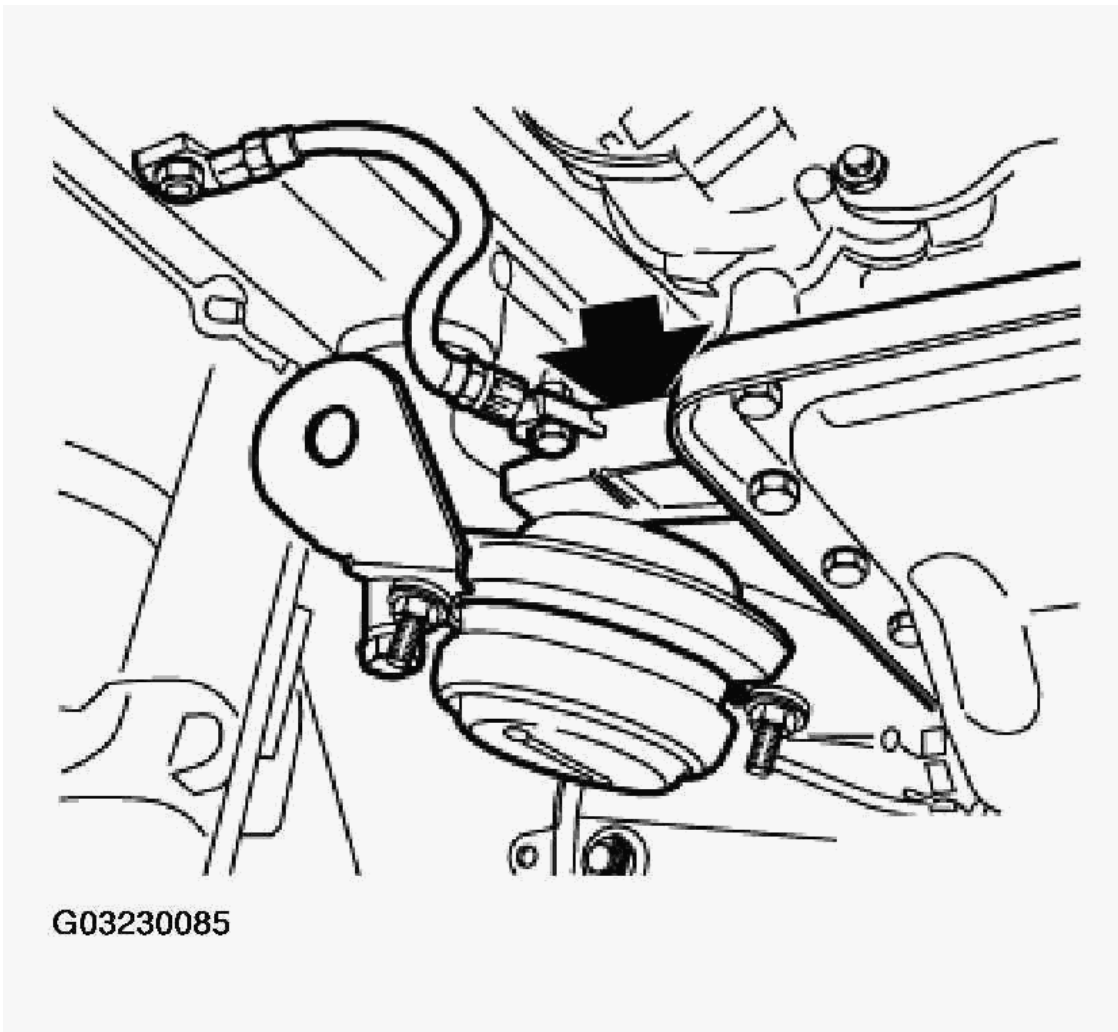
View Of Top Left/Right Engine Mount Nuts
